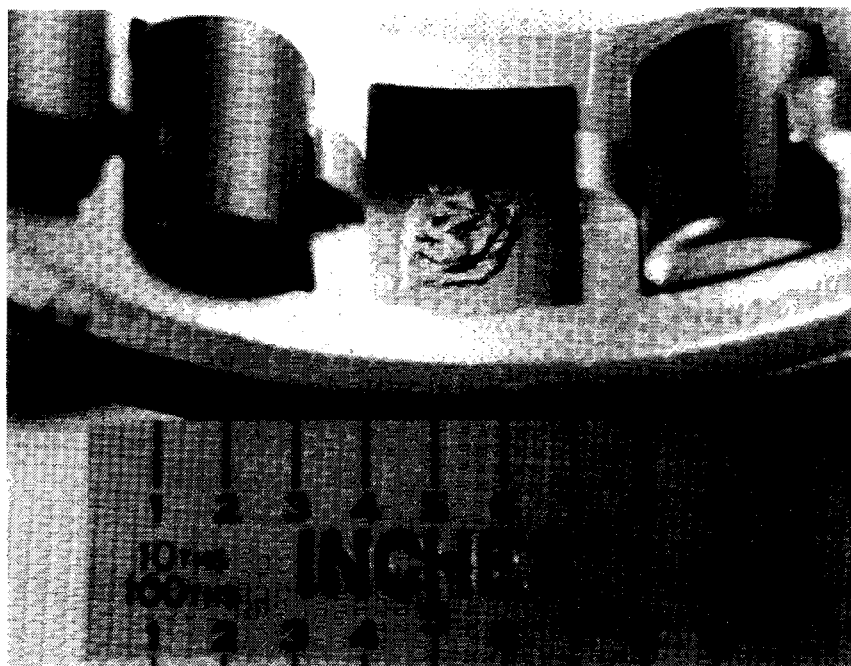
90-Degree Gearbox -455 Bearing Outer Race C/D,
